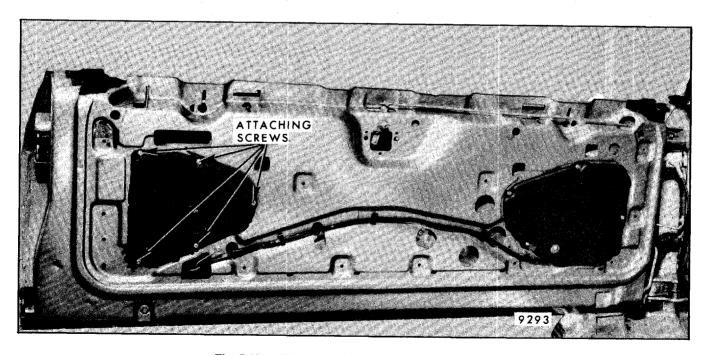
Tailgate Inner Panel Access Hole Covers
